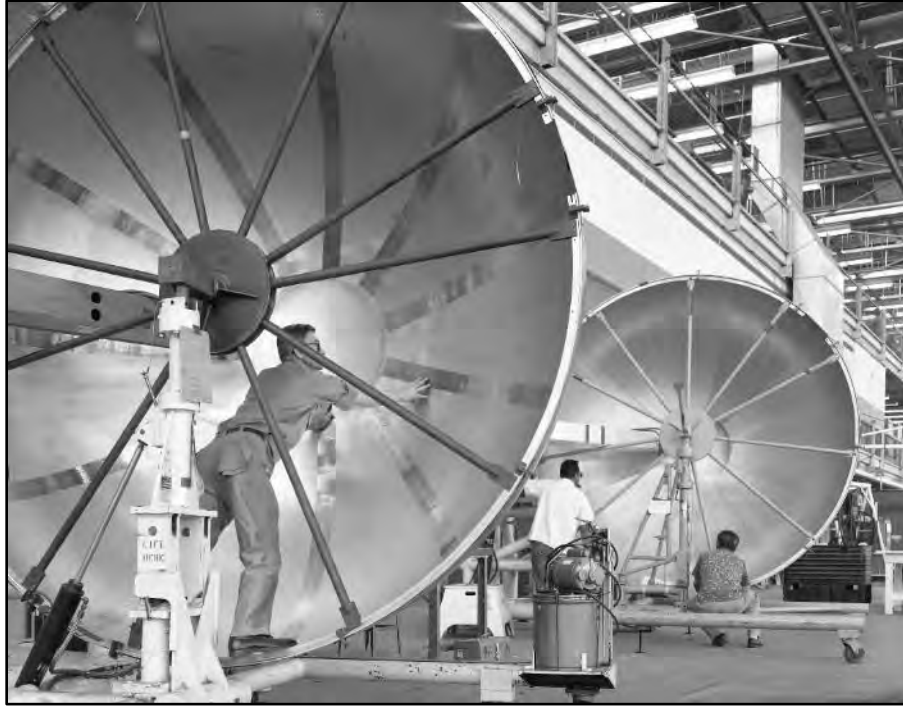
R. Feener Checking Bulkhead Seams, Building 3 (September 16, 1960)
